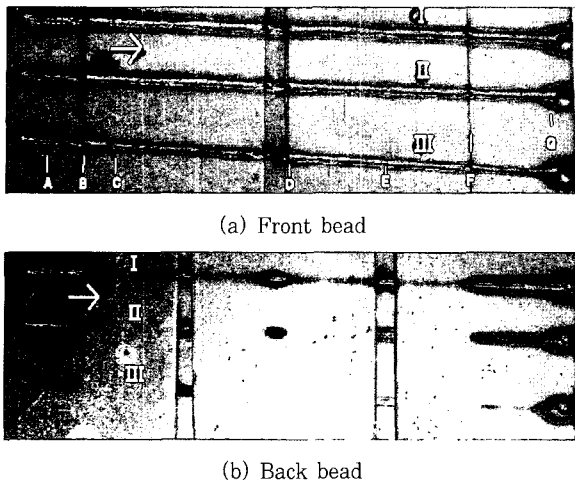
Photos of the laser welding bead; welding speed ( $v$ ): I(2m/min), II(3m/min), III(4m/min)
